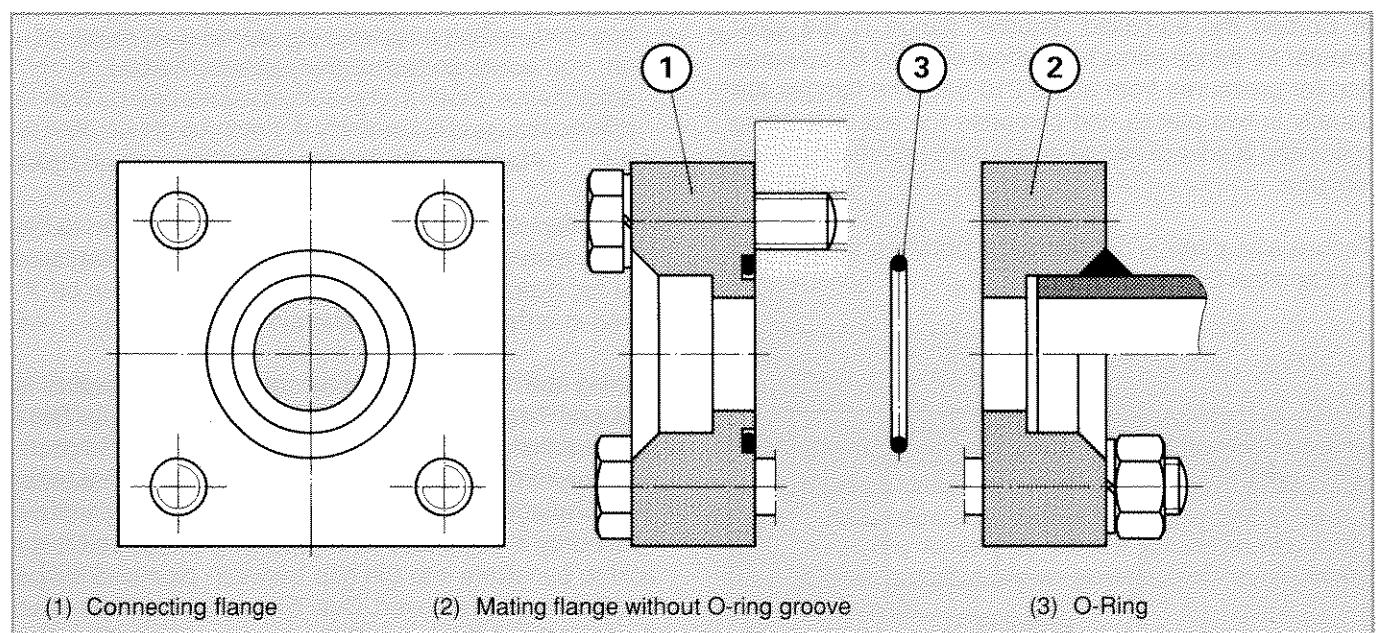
Square flange and flange joint, securing function by screws, flange joined to pipe by fillet weld, elastic seal usually an O-ring
